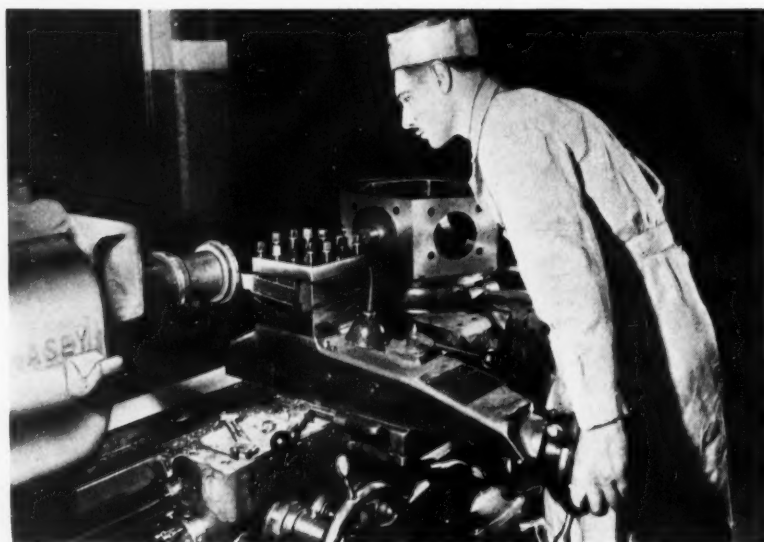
An Actual Operation is Performed after a Turret Lathe has been Completely Assembled to Determine its Machining Accuracy
